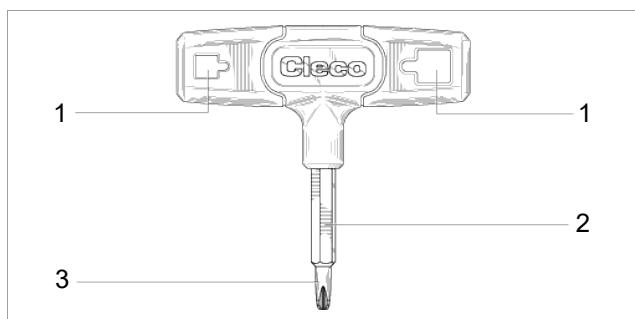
Clutch Adjustment Tool Order no. T50-1001619
